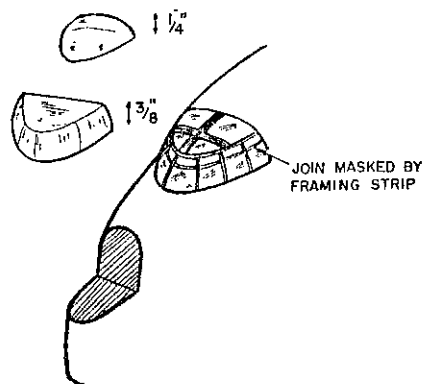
Method of making deep cockpit covers in two layers of solid perspex.
